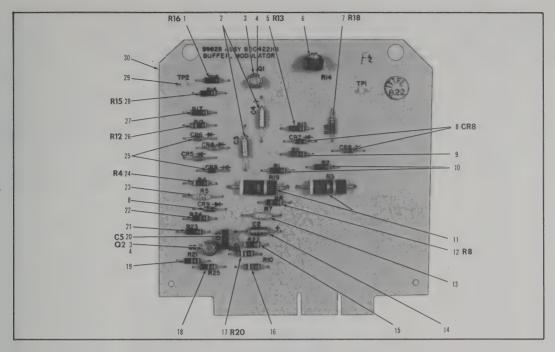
Circuit Card Assembly, Buffer, Modulator, 1A5
